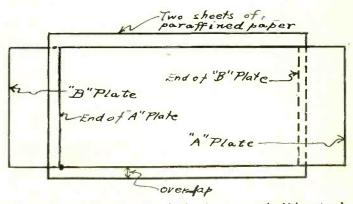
General idea of how the tinfoil and wax paper should be cut and placed in making a condenser.
